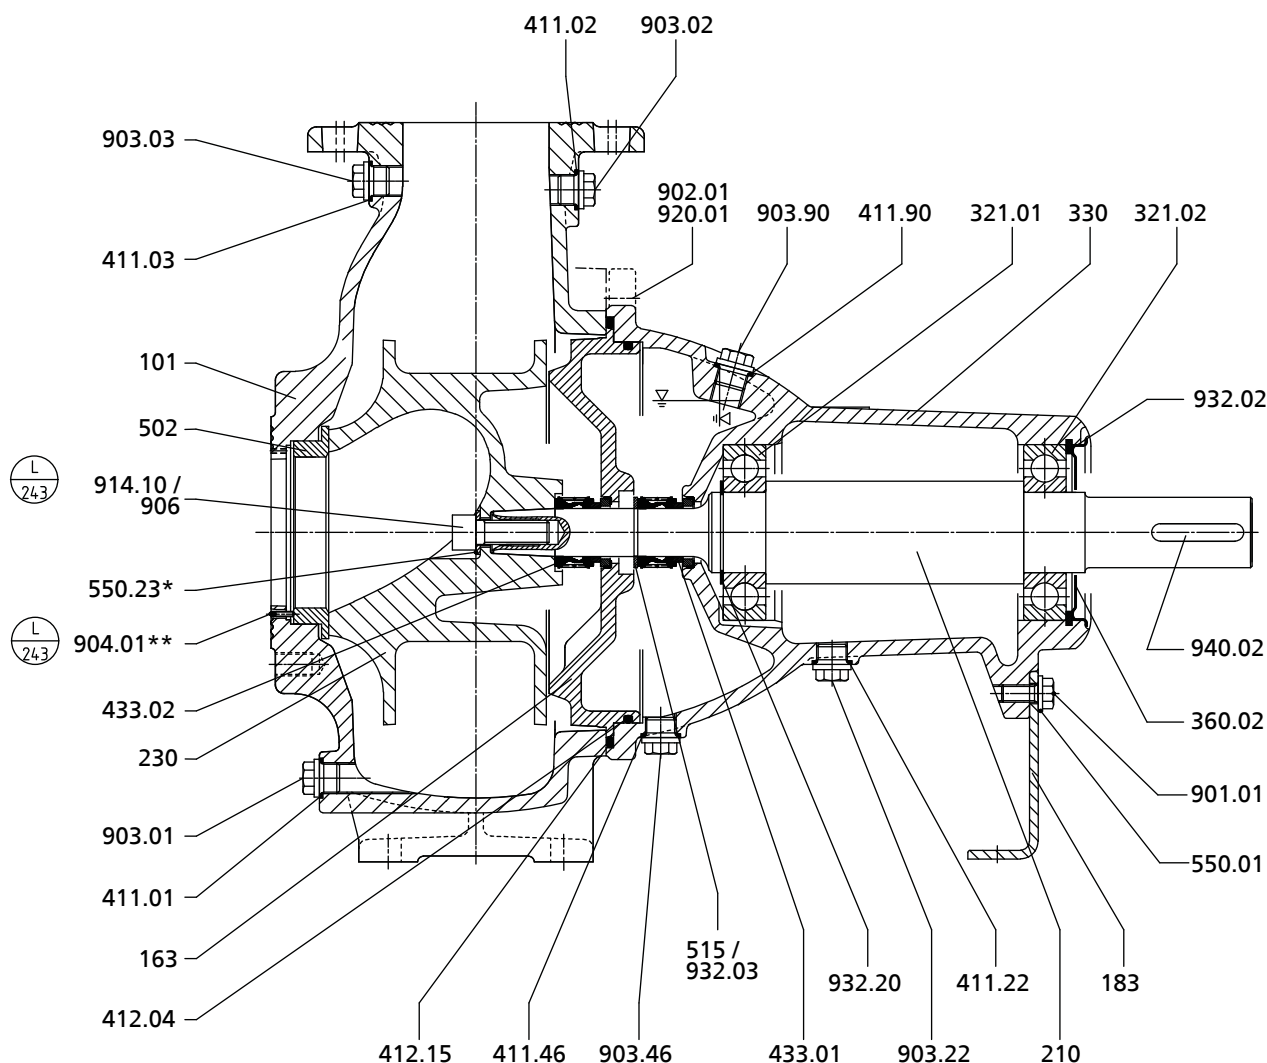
General assembly drawing of Sewatec - with bearing brackets S01, S02, S03, S04, impeller type E; * if any,  only for sizes E 100-250, E 100-253, E 100-317, E 150-317, K 100-253, K 100-254, K 100-316
